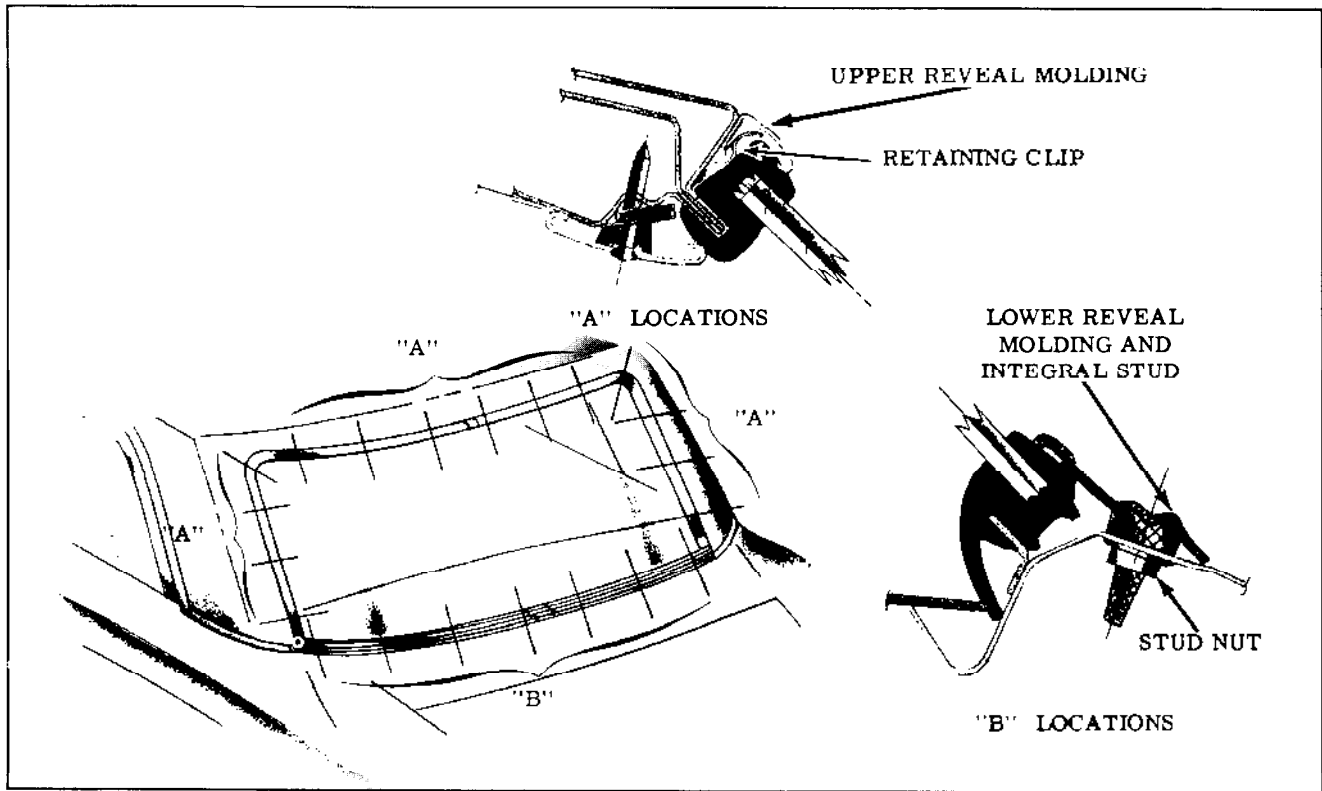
Back Window Reveal Moldings ("17" Styles)
